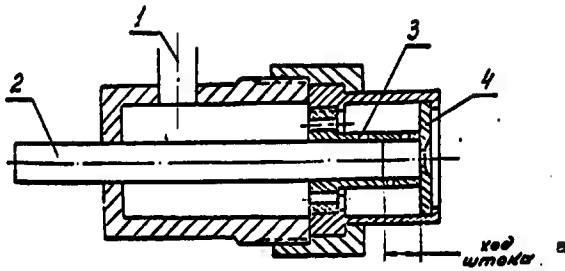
Diagram of fuel spray nozzle: 1) Supply of fuel; 2) movable rod; 3) beaker with tangential orifices; 4) nozzle; a) Rod travel.
